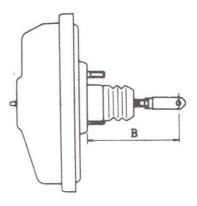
Brake pedal-to-vacuum servo unit pushrod setting dimension (Sec 15)
